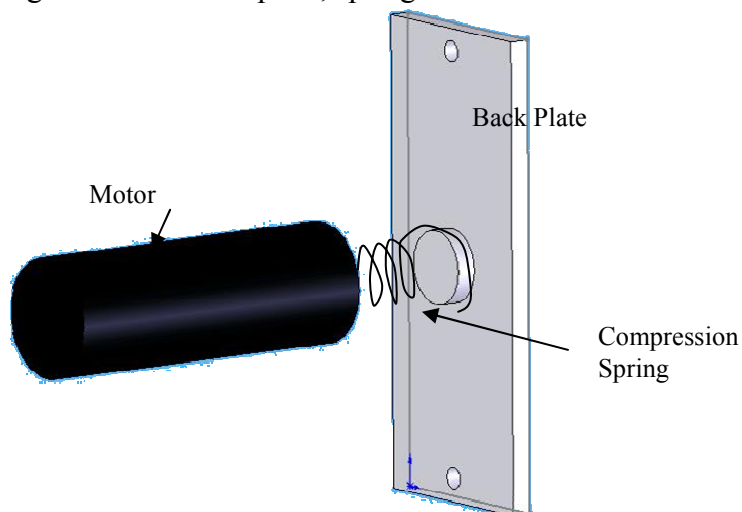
CAD Diagram of Back Plate, Spring and Motor
